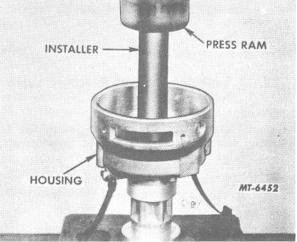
Installing Upper Bushing Using Bushing Installer SE-1955-8
